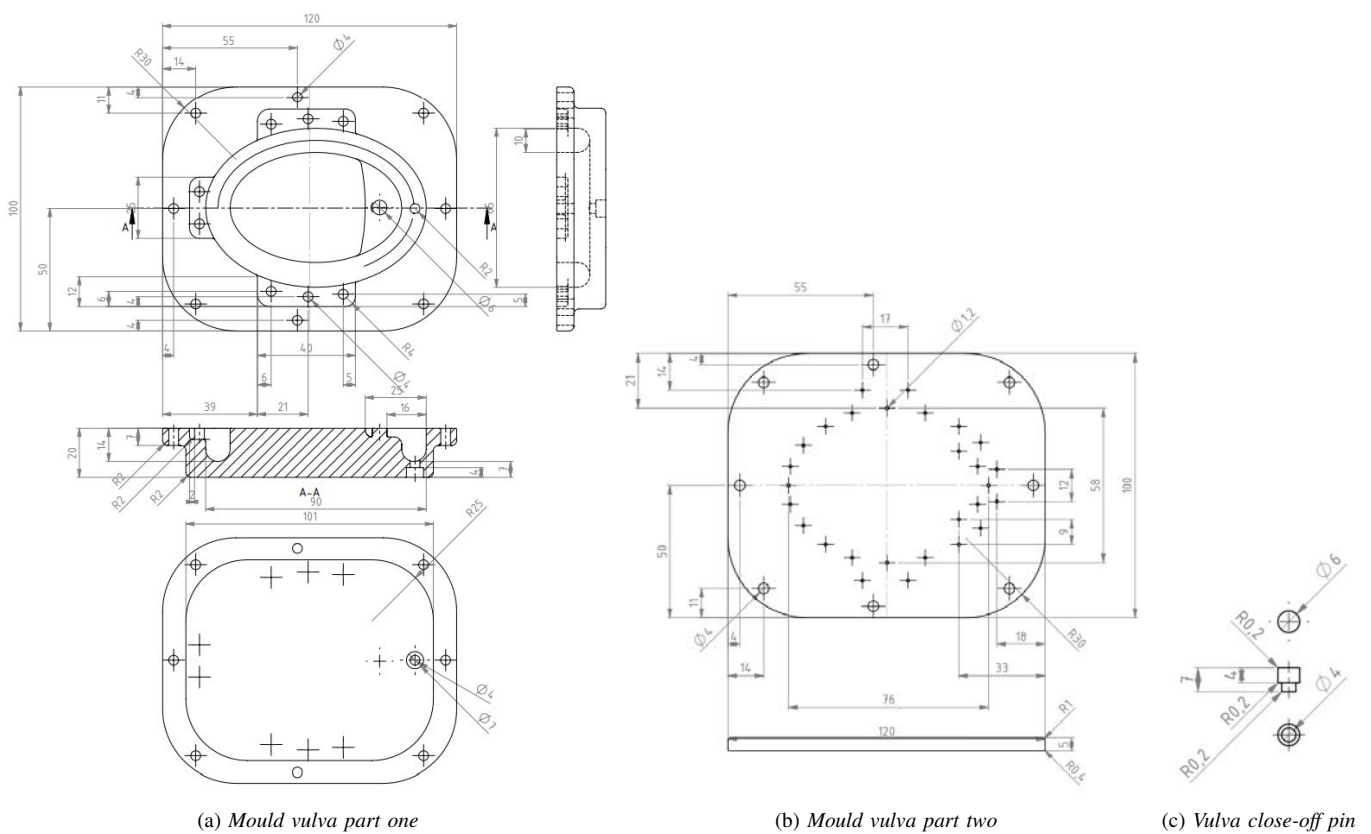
Technical drawings parts mould for the vulva in mm.
